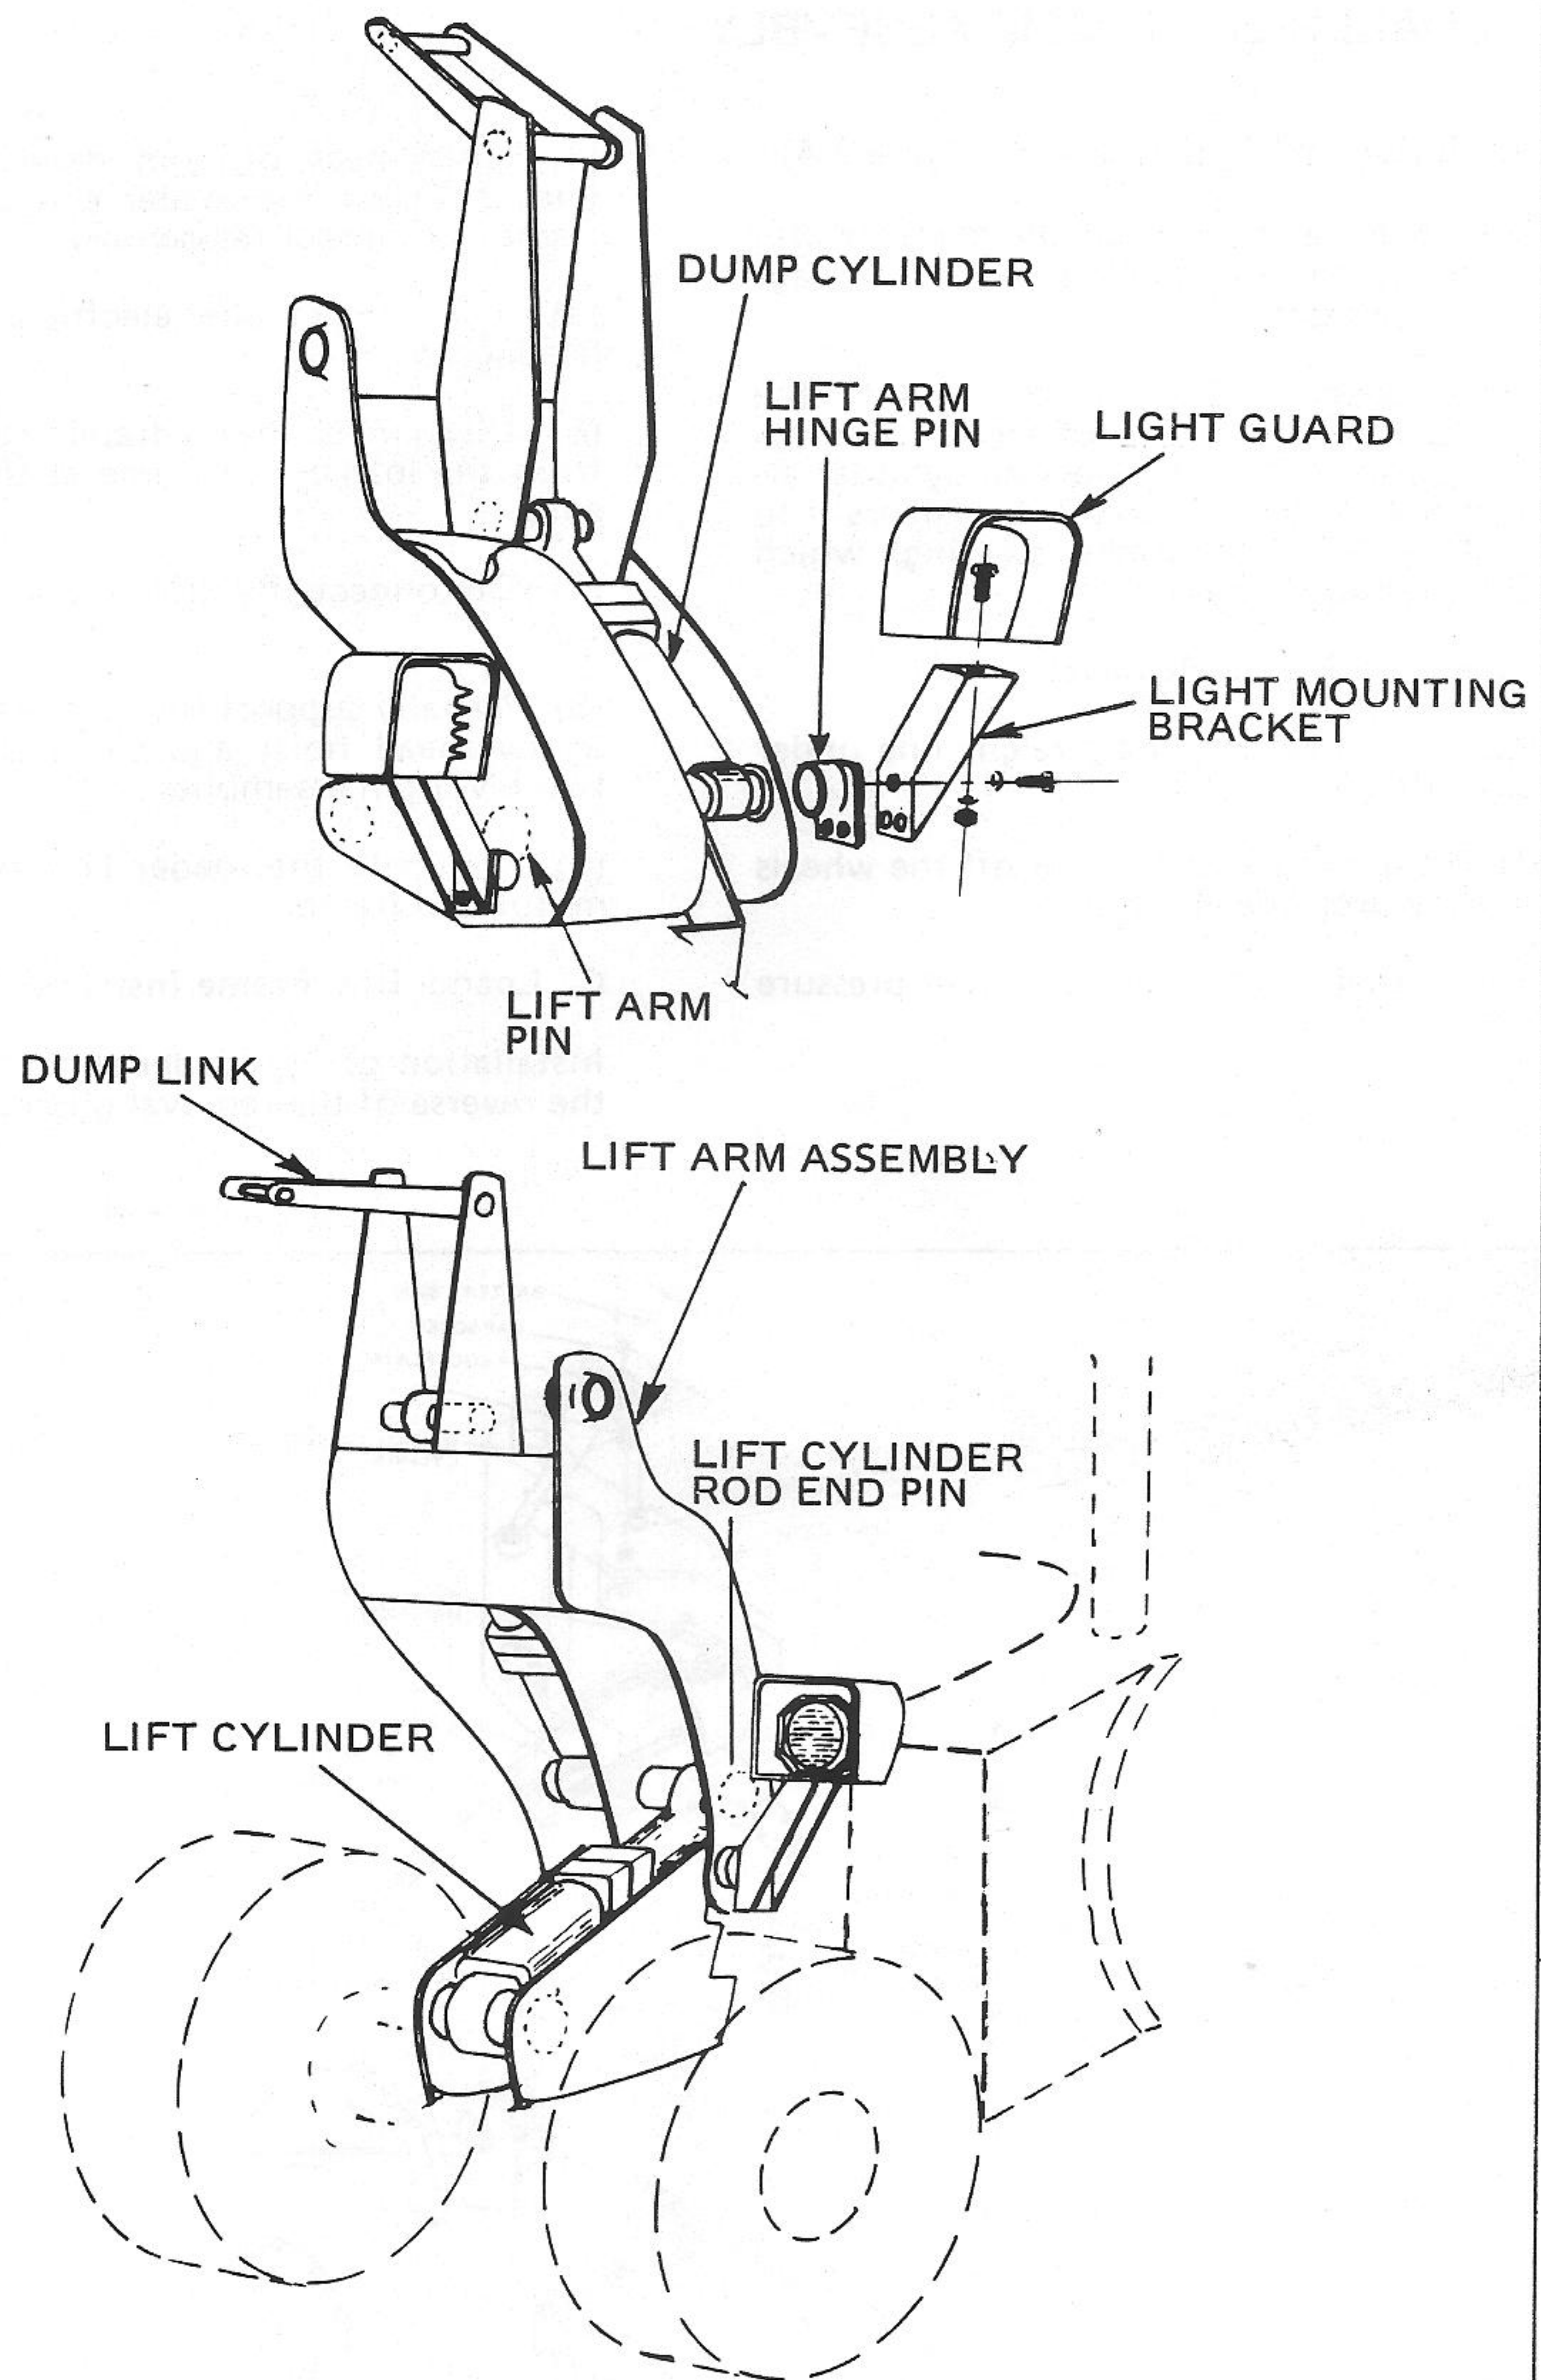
3. LIFT ARM ASSEMBLY
